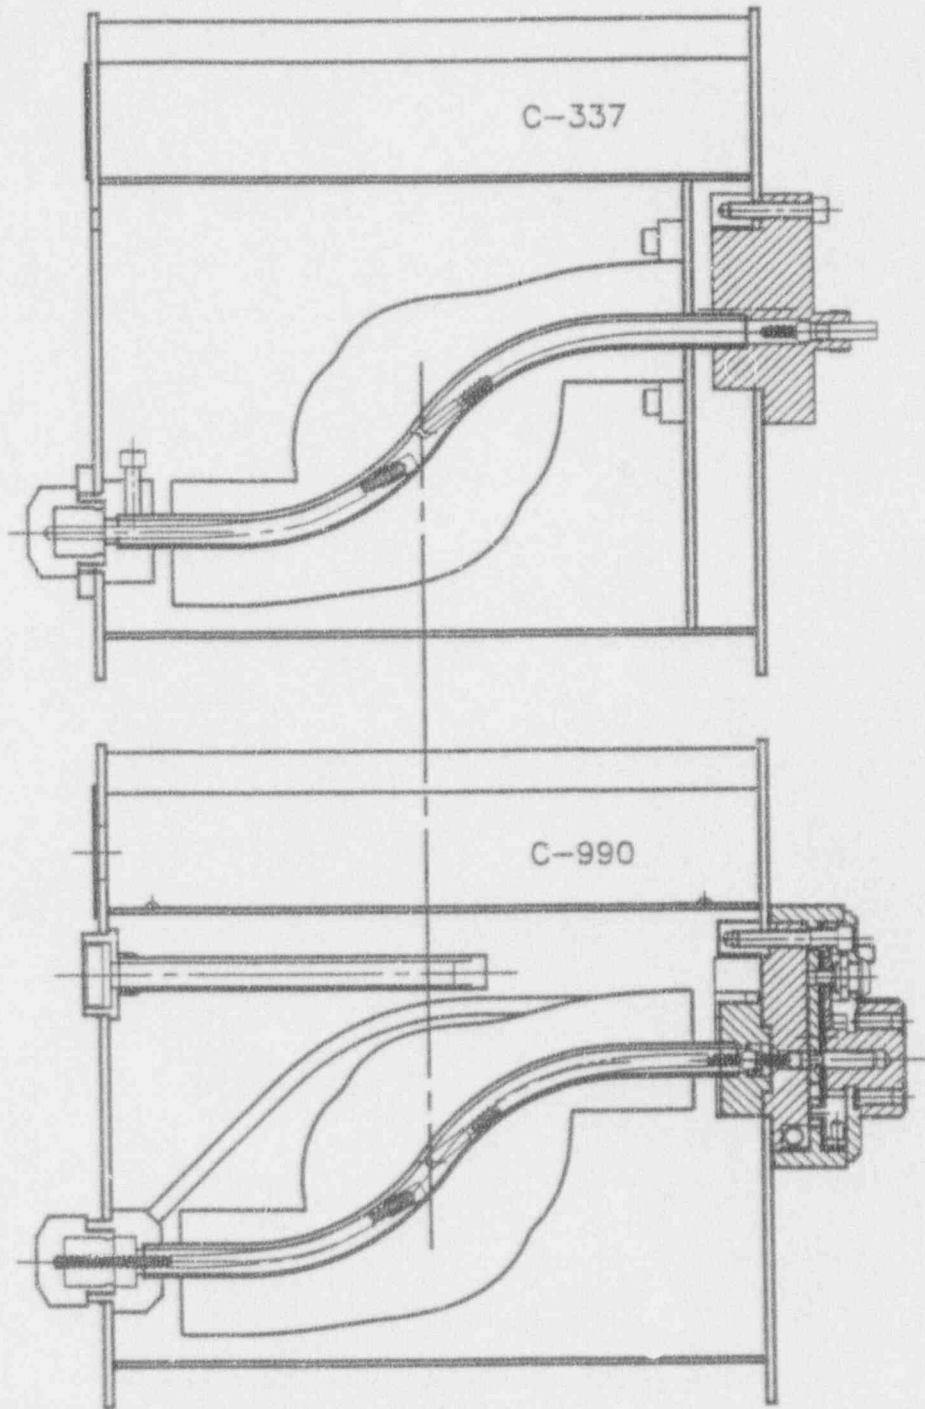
Shield Jig and C-337 Source Assembly for Initial Radiation Shielding Test.
